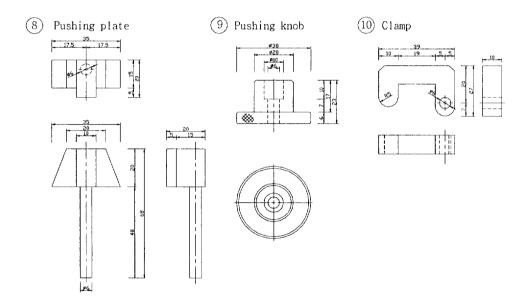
(b) Drawing of pushing plate, pushing knob and clamp among jig components.
